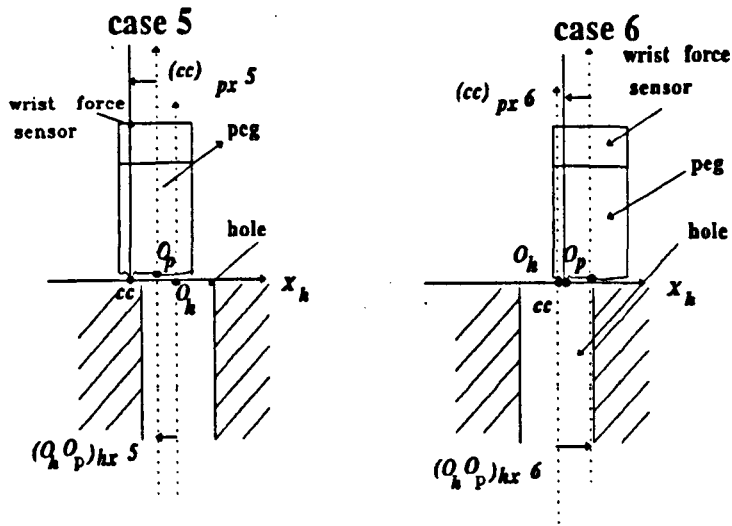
Contact configuration with wrist force sensor and defects of contact surfaces
